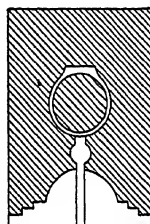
Wax pattern held on a sprue pin and sprue former
